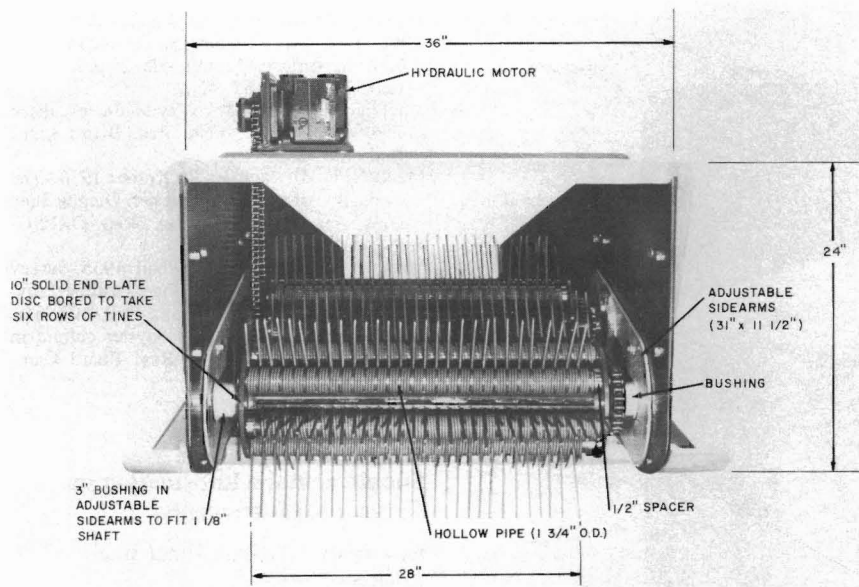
Front view of head showing details of drums and the steel rake teeth.
